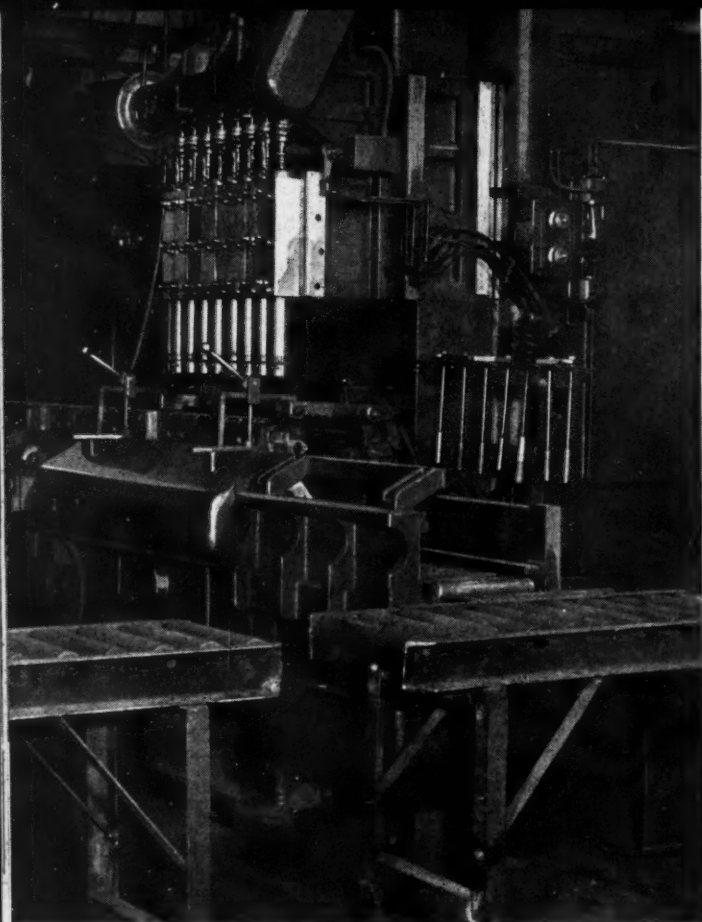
Special Eight-spindle Ex-Cell-O Hydraulically Operated Machines are Used for the Precision Boring of Buick Engine Blocks. Spindles are Revolved at 500 R.P.M. and Fed at 0.007 Inch per Revolution
